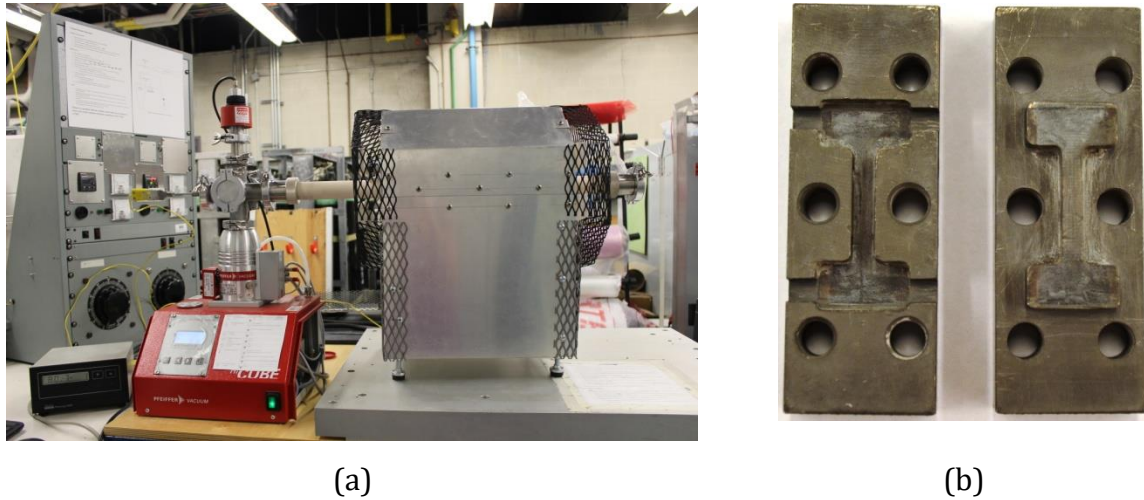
(a) Vacuum furnace used for annealing and diffusion bonding; (b) diffusion bonding mold used for this study.
